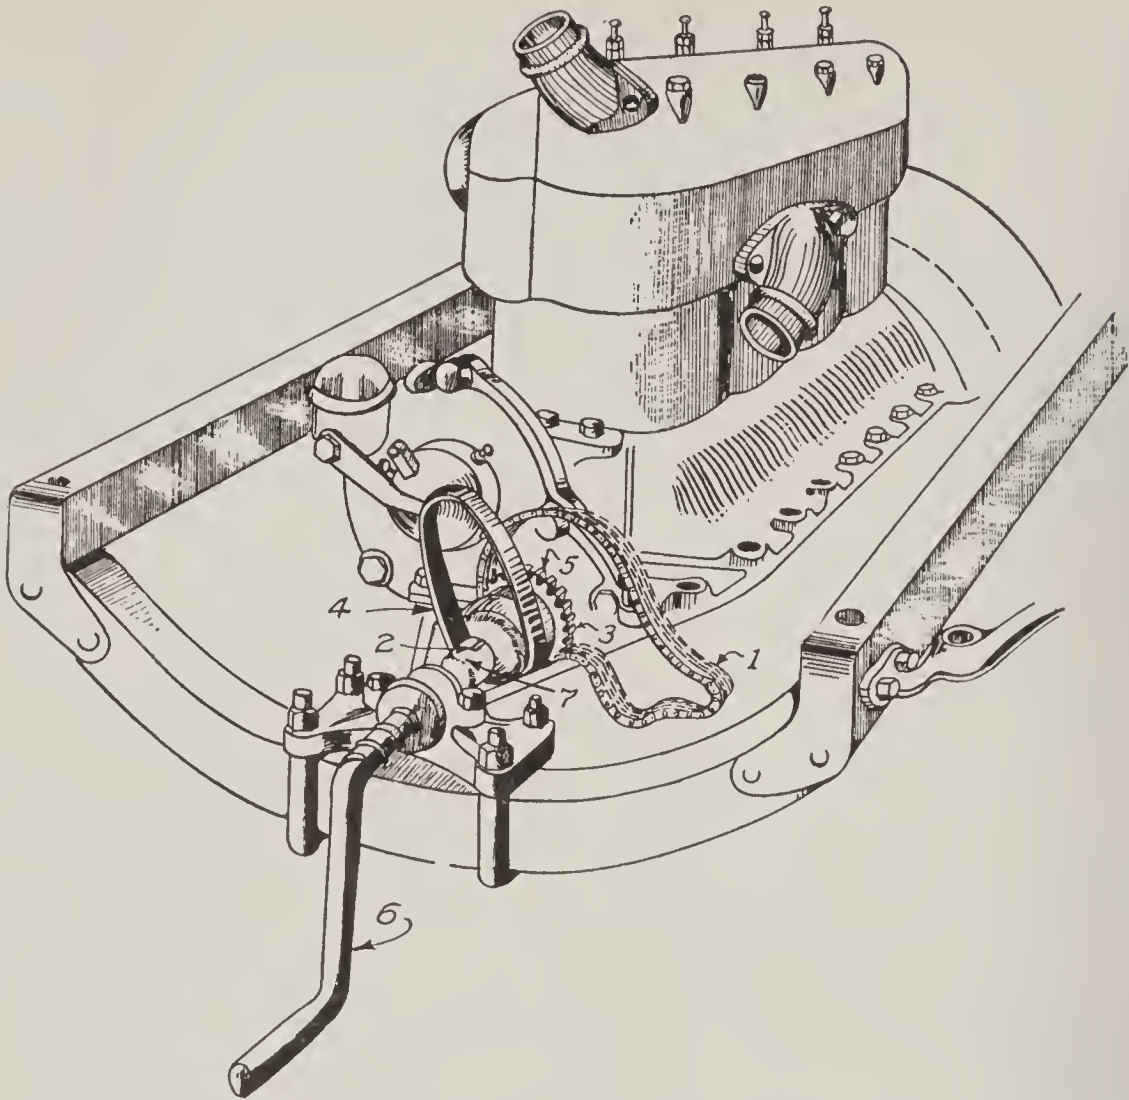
Putting Driving Chain on Crankshaft Sprocket in Gray & Davis Ford Installation
